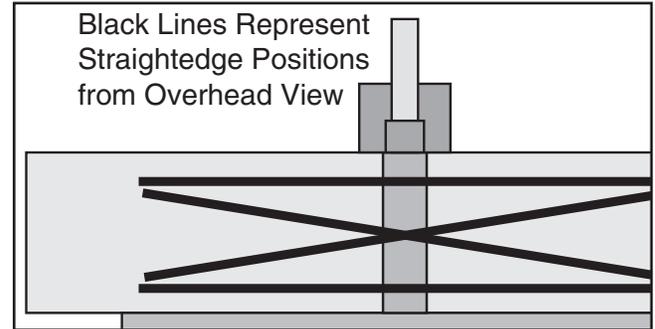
Straightedge positions for checking infeed/outfeed table parallelism.
